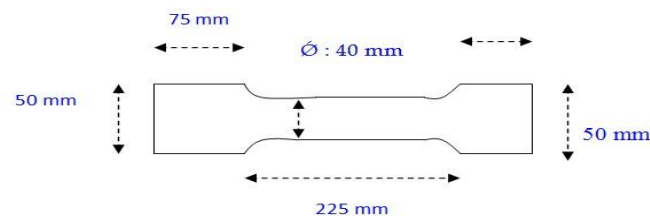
Dimensions And Sizes of Specimens for Tensile Tests
